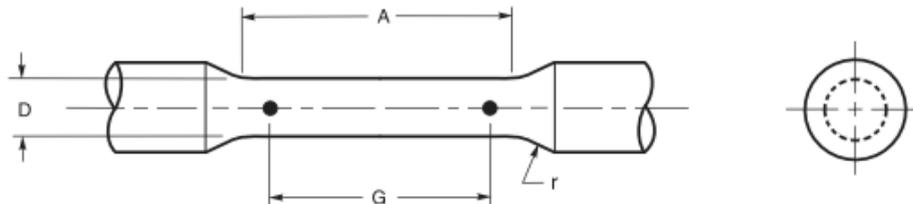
Reduced-Section Tension Specimens (see 4.9.3.4)
